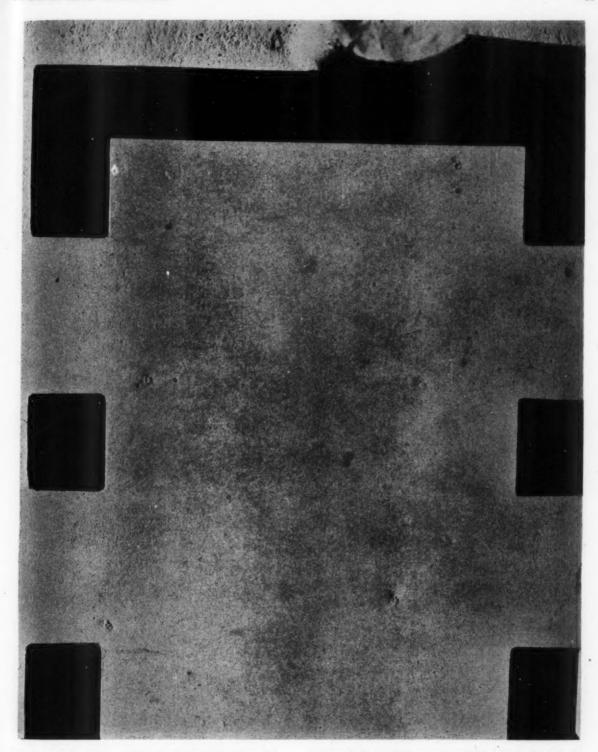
Photo shows a sandblasted cope surface of a casting of aluminum-base alloy containing 10% magnesium. The gating system used is illustrated by Fig. 42. A few cope surface defects
